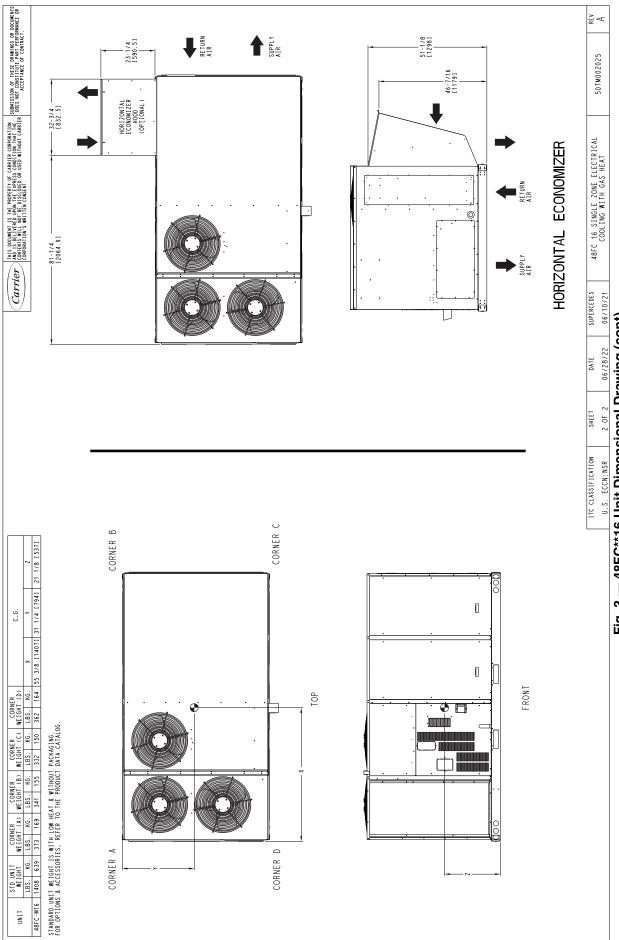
48FC\*\*16 Unit Dimensional Drawing (cont)
